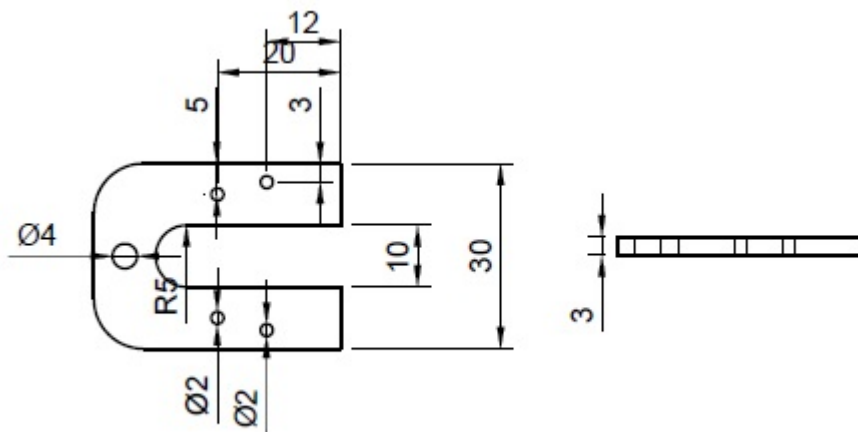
Drawing of the U shaped component responsible for connecting the main heater parts to the heater arm. This component is made of 3 mm thick MACOR, and has a set of 2mm diameter holes for the heater attachment, and a 4 mm wide hole for an adjustable mounting to the heater arm.
